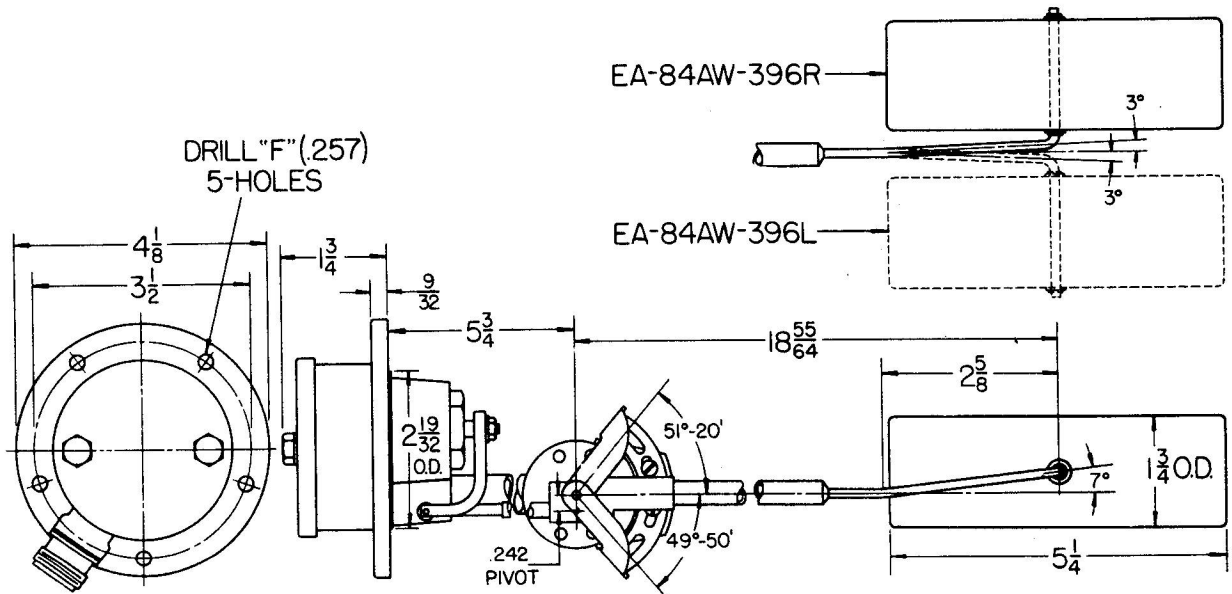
(Sheet 2 of 4 Sheets). General Dimensions
